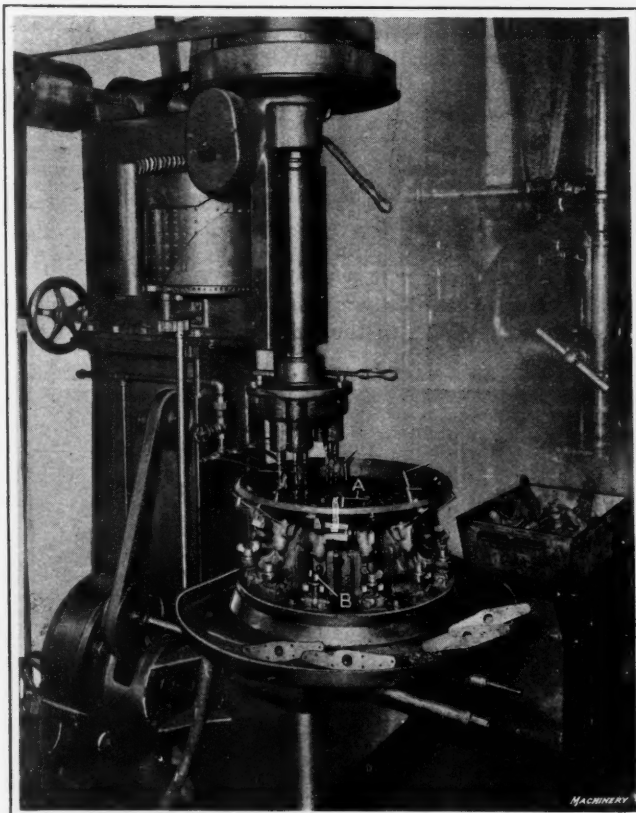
Baker Bros. Semi-automatic Drilling Machine with Station Type Work-holding Fixture which is automatically indexed
